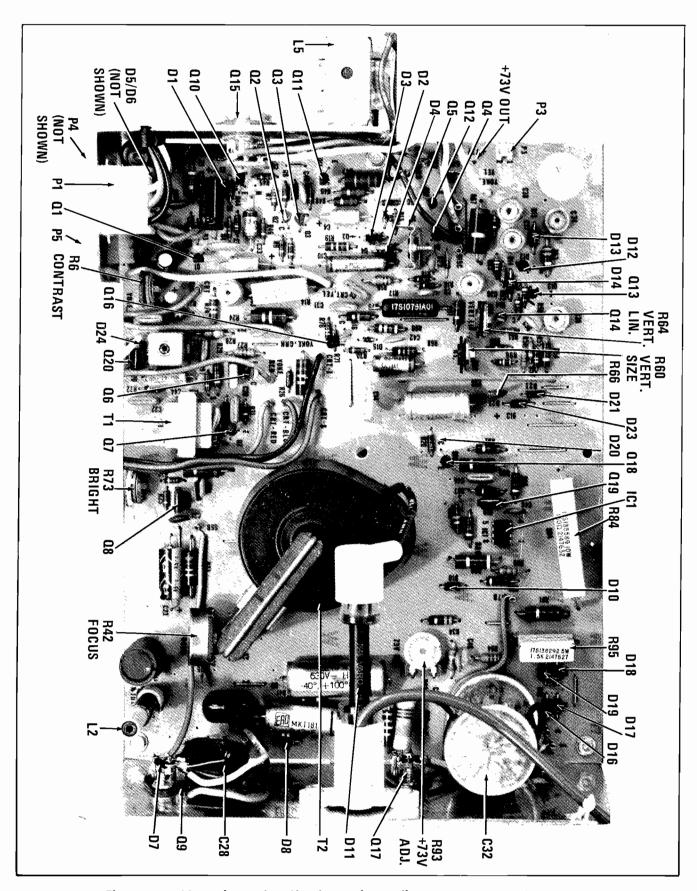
Motorola Monitor Circuit Board Detail—Component Location
